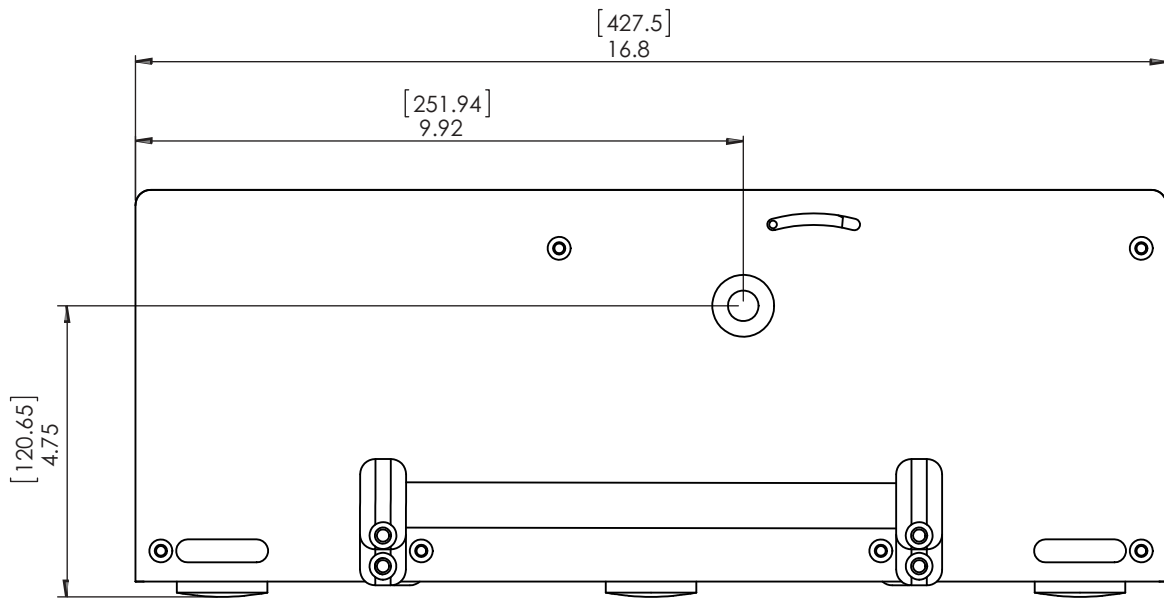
Vitara Laser Head Dimensions (Top View)
